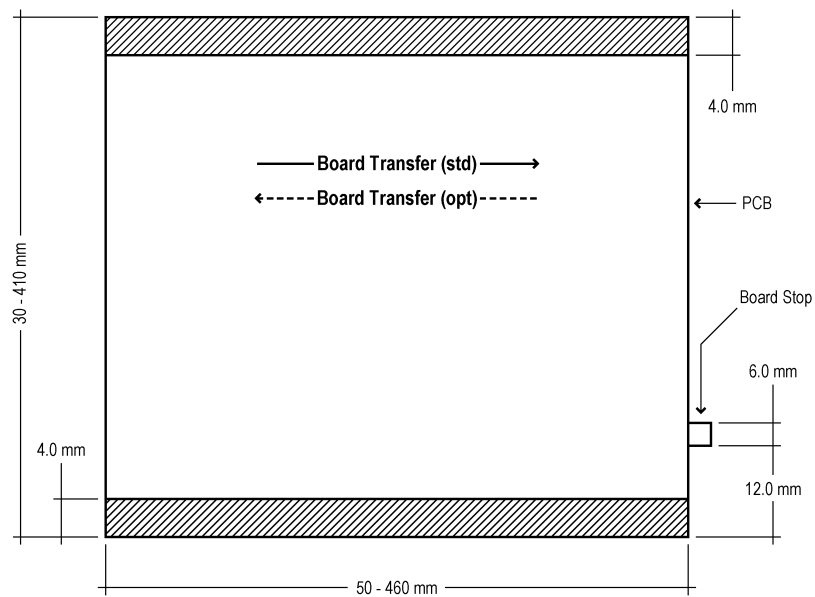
PCB Fiducial Mark Unallowable Area (using edge positioning)
